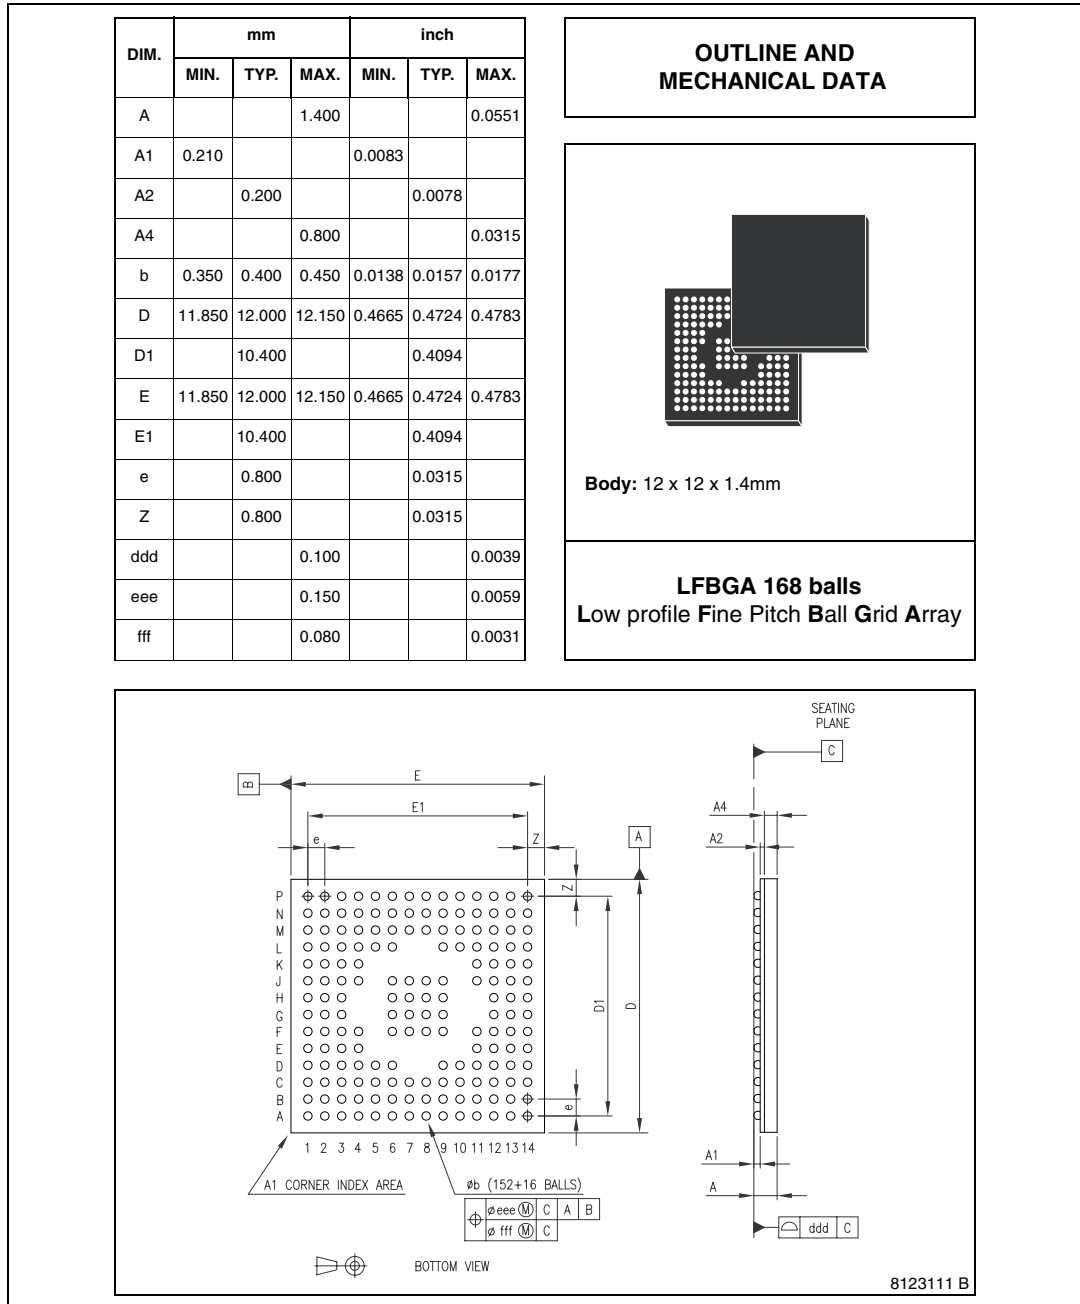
LFBGA 168 balls (12x12x1.4 mm) mechanical data and package dimensions
